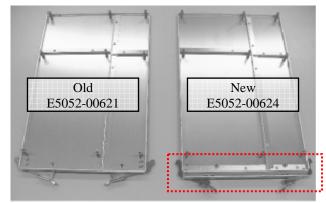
Old (E5052-00621) and New (E5052-00624) shield case
